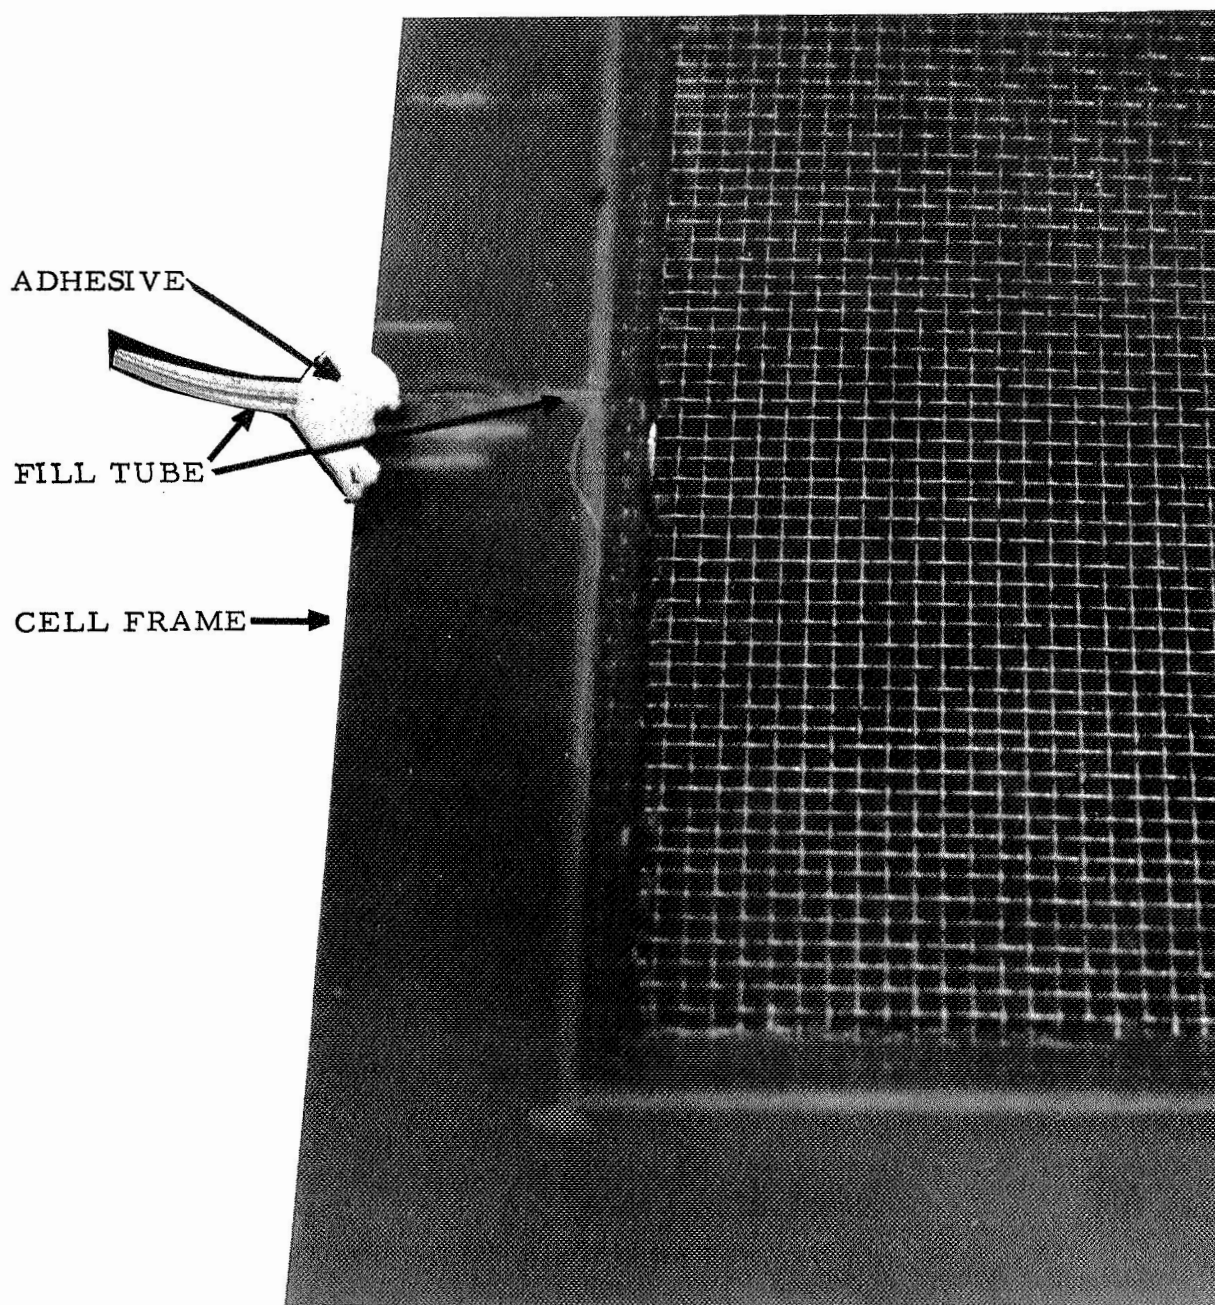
Corner of Electrode Assembly with Capillary Tube Inserted, W681
